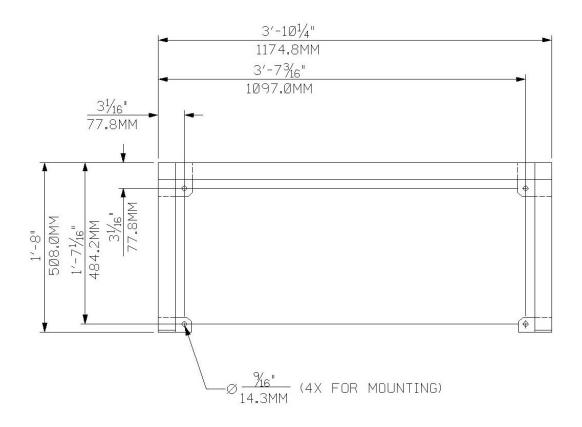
Mounting Hole Locations 1x2 Cylinder Rack or 1x2 Cylinder Euro Rack
